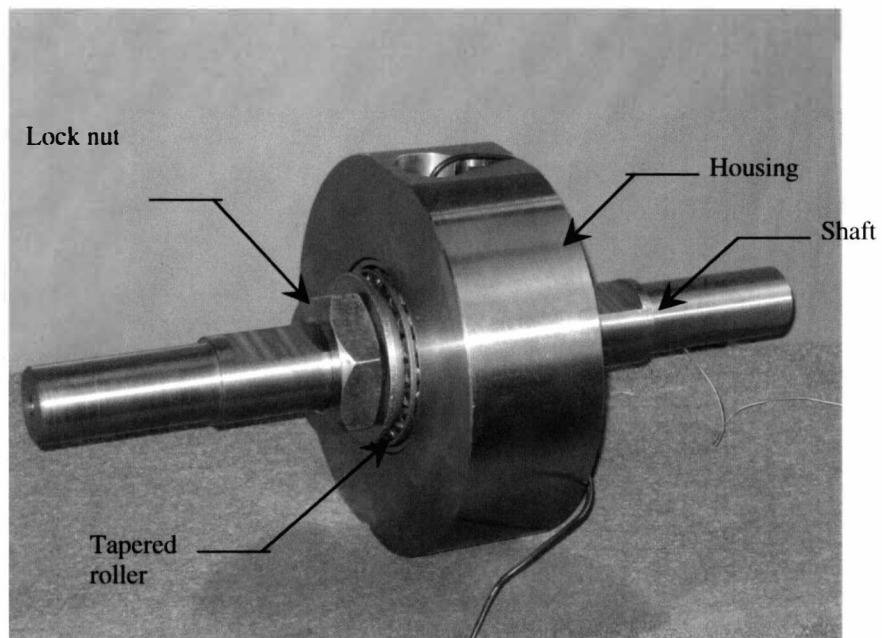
Radial test fixture to measure the displacement across two bearings
